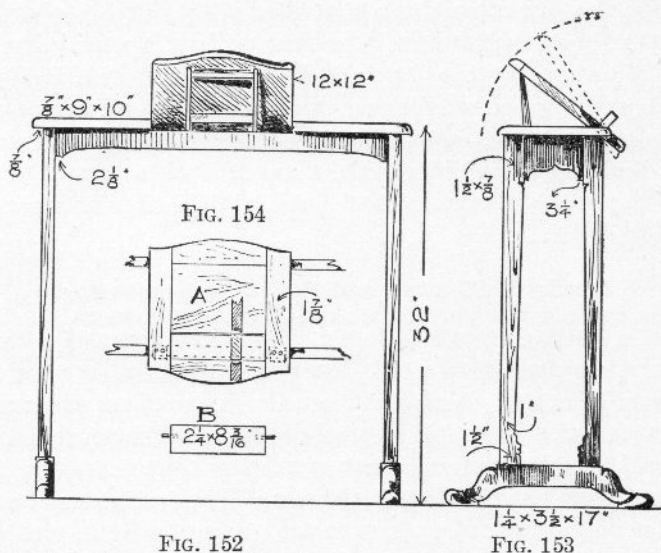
, 153 and 154.—Elevations and Details of a Reading Table.
